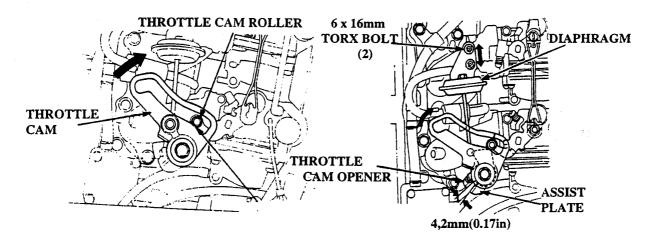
Throttle-cam position Fig. 14-22 Assist-plate/throttle-opener clearance
